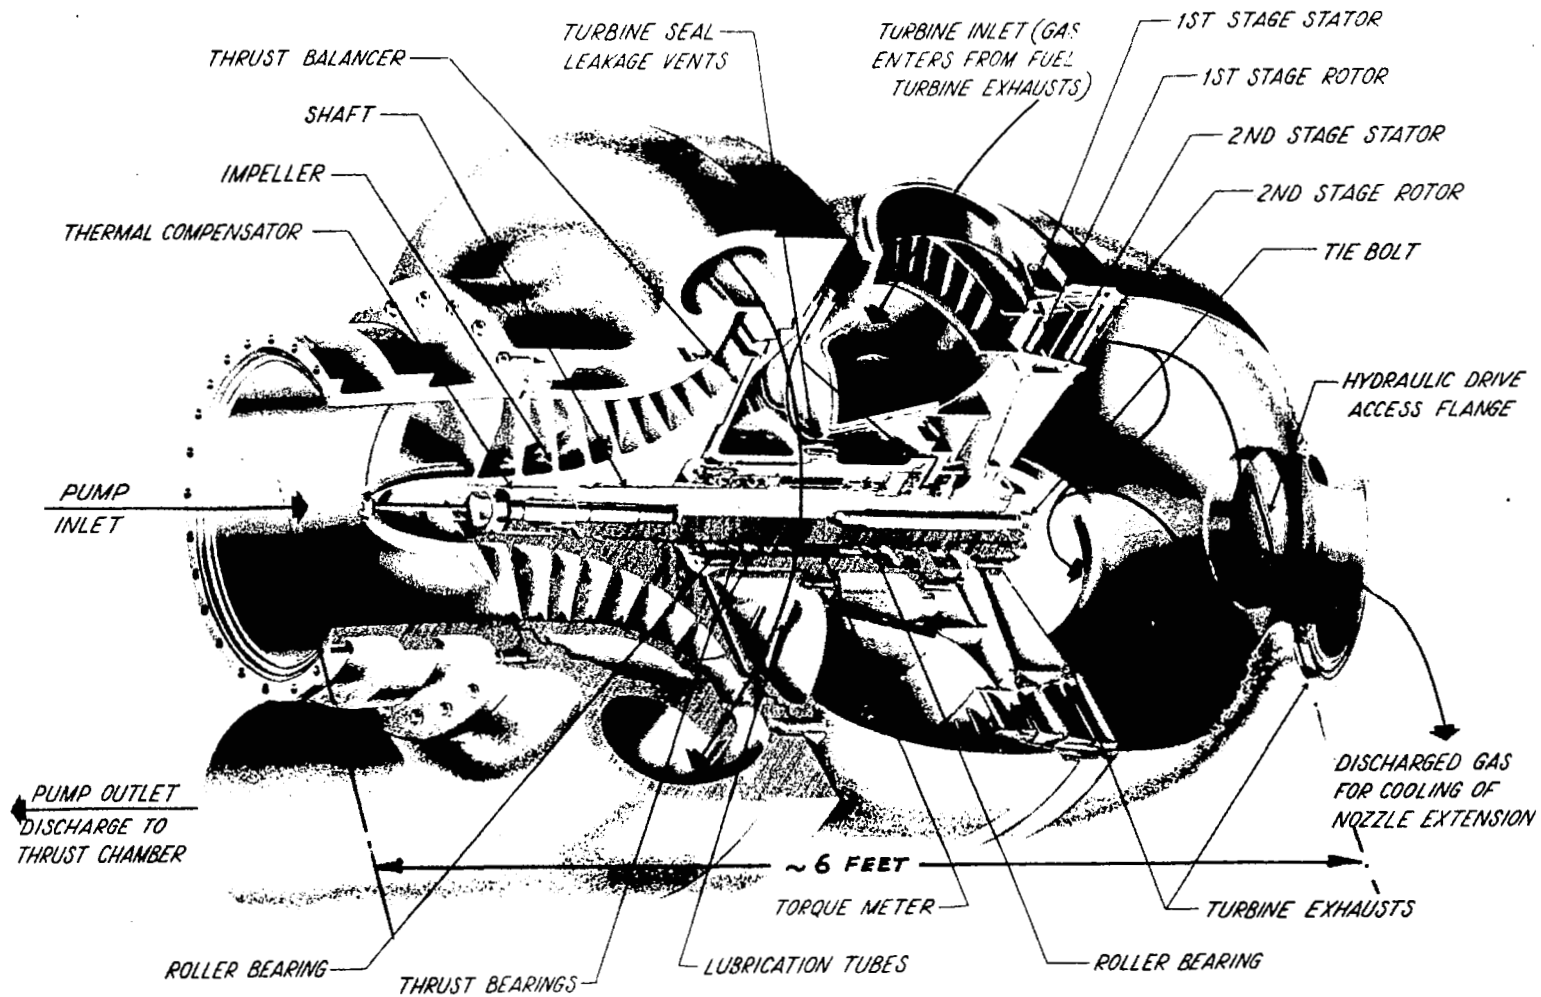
OXIDIZER TURBOPUMP ASSEMBLY
